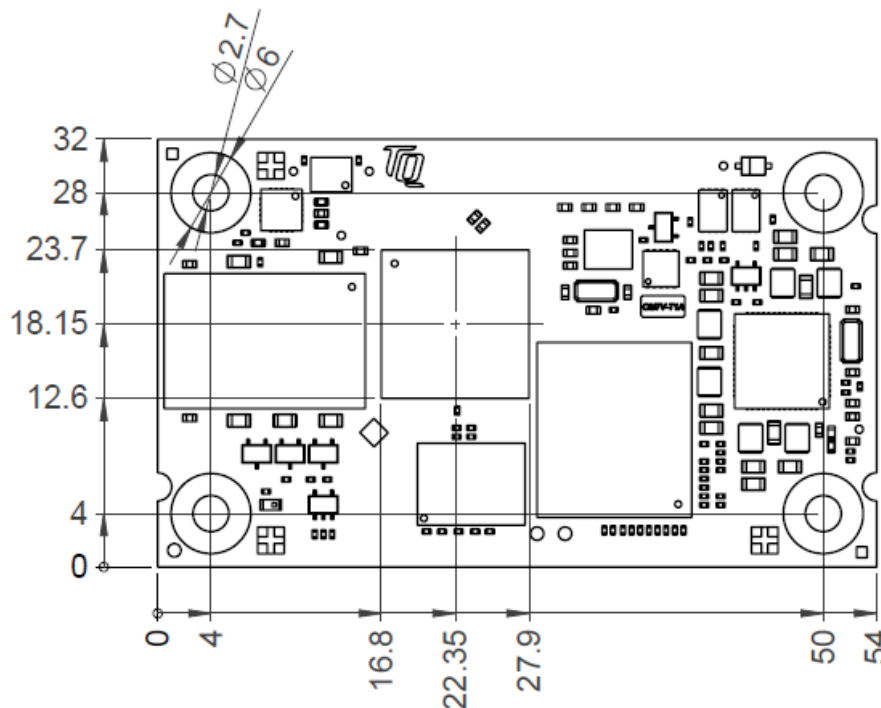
TQMa93xxCA dimensions, top view (dimensions in mm)
